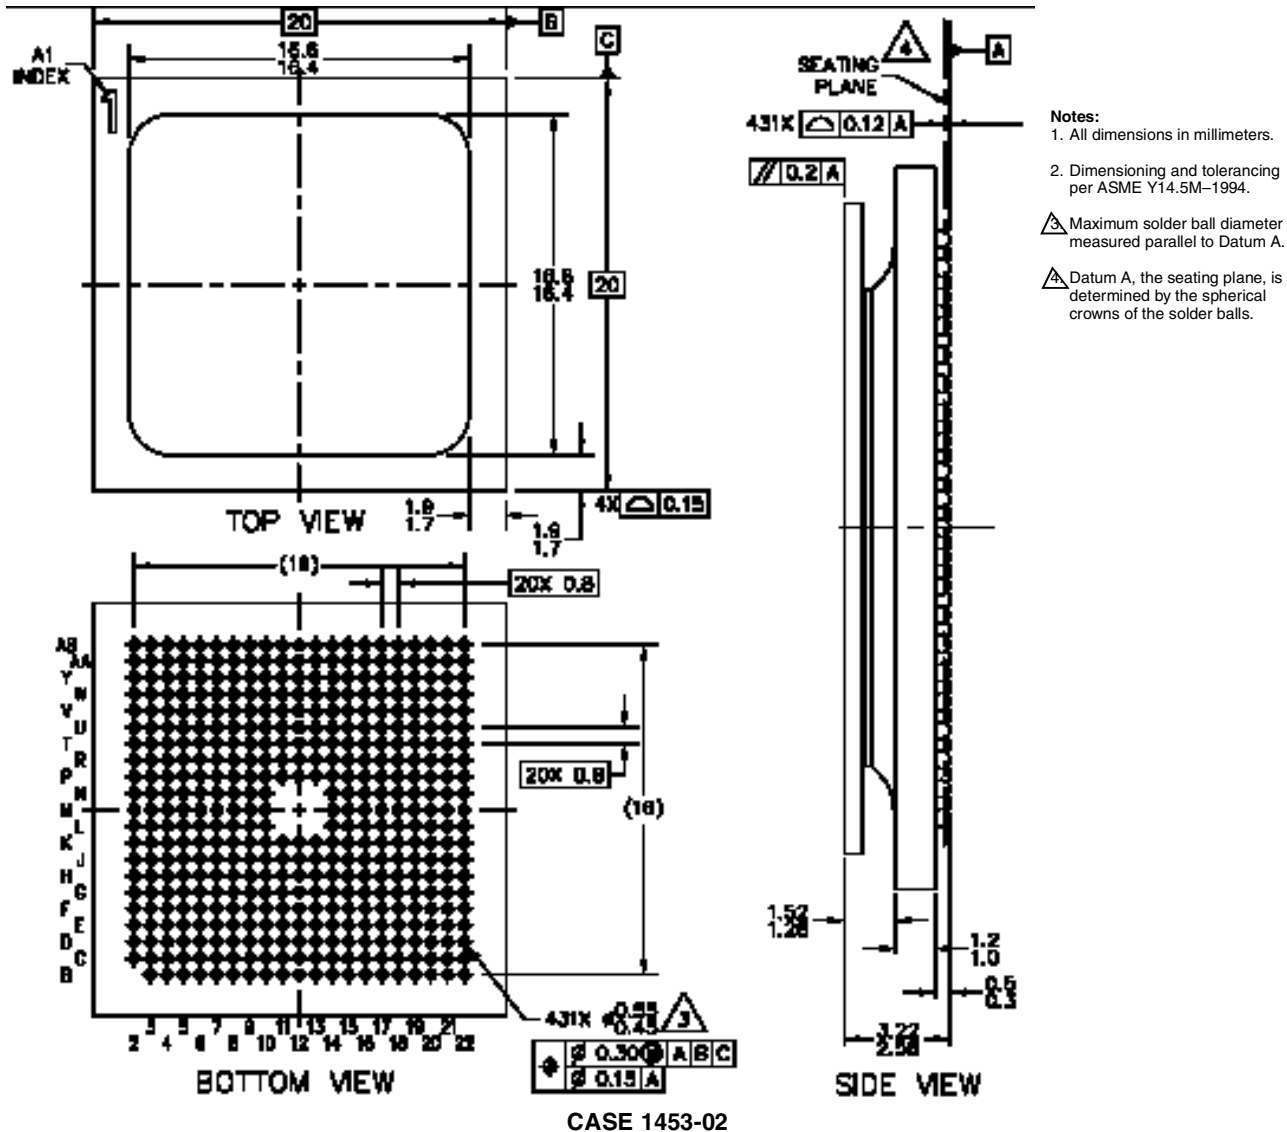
MSC8102 Mechanical Information, 431-pin FC-CBGA (HCTE) Package
